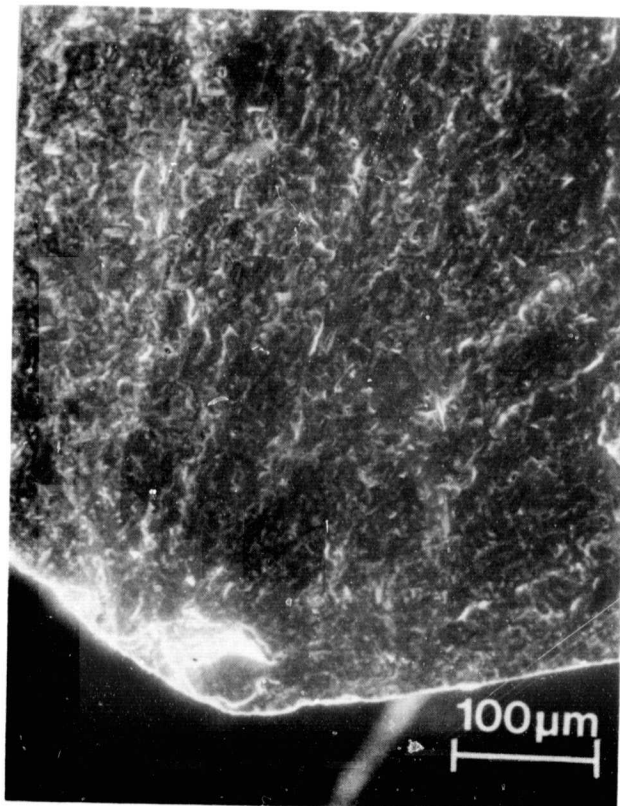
PROCESSING FLAW AT CHAMFER EDGE FOR
